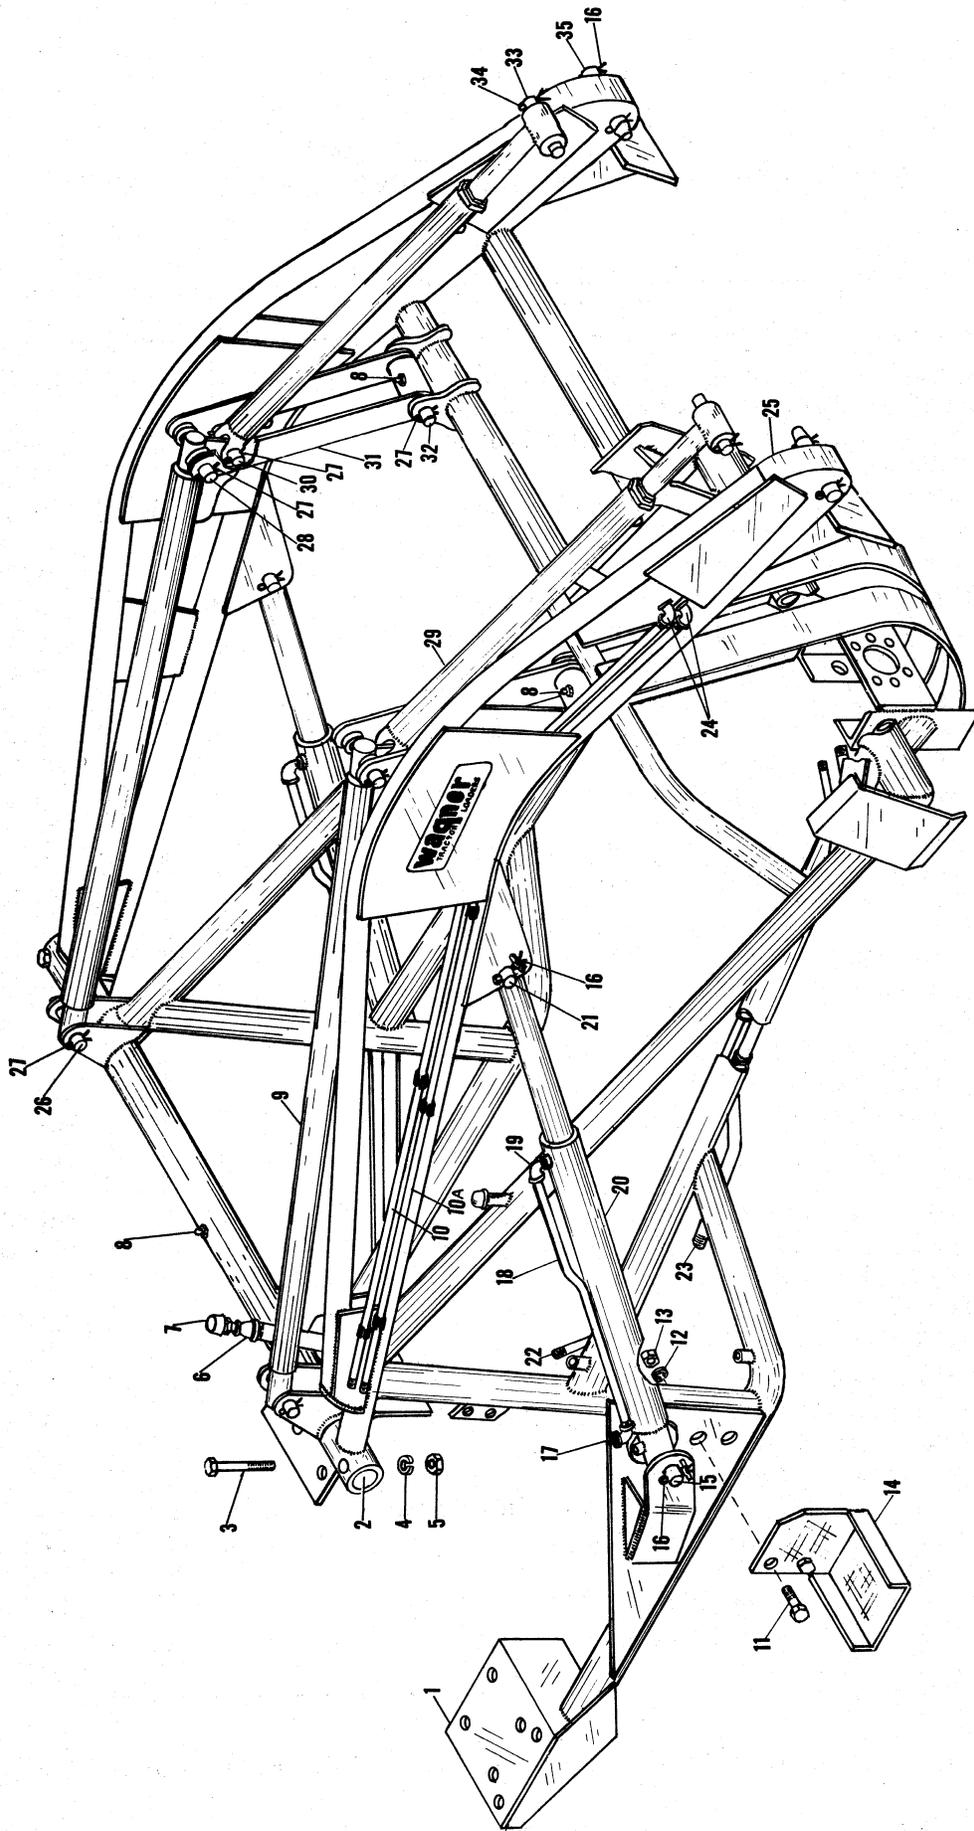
, Main Frame and Dipperstick Assembly of Wagner V7 Hydraulic Loader for Fordson Major Tractor
